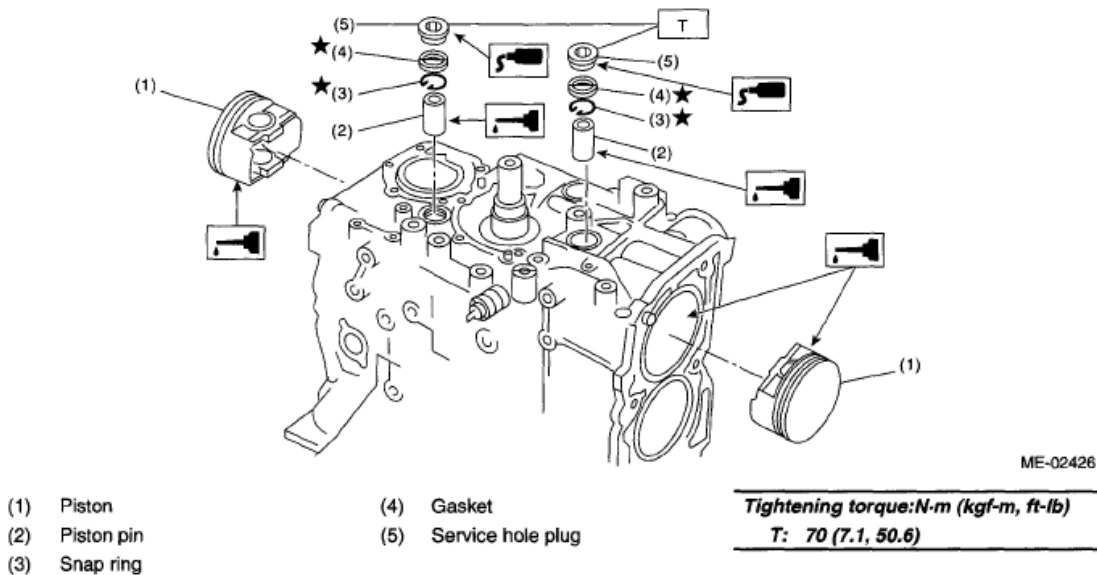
Identifying Piston, Piston Pin, Service Hole Plug, Gasket And Snap Ring With Torque Specifications
